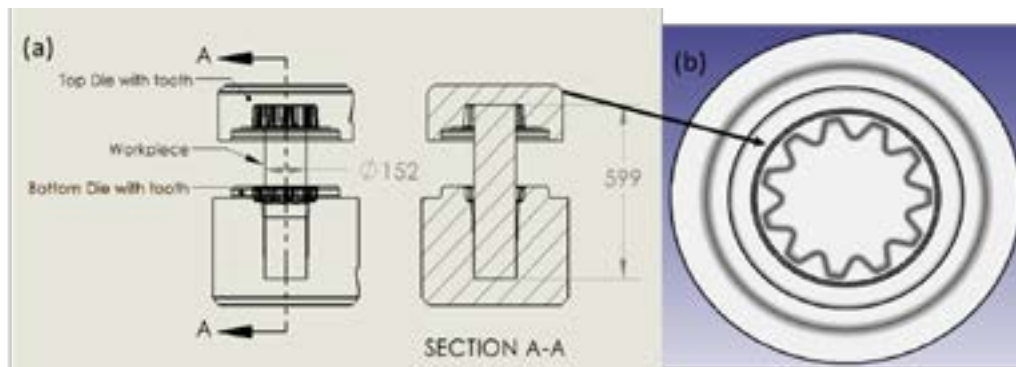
a) Schematics of near-net-shape forging, b) Top die with gear teeth incorporated.
